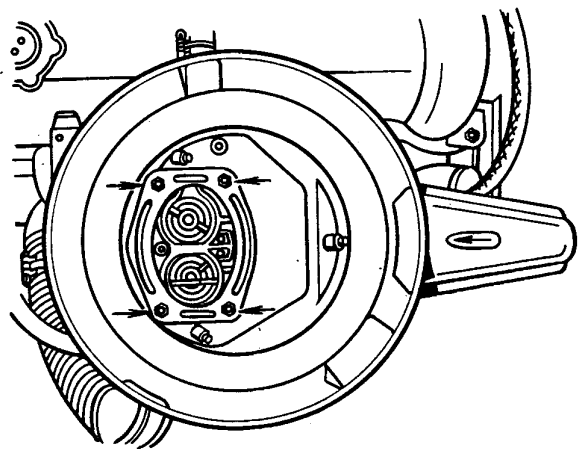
Removing Air Cleaner. Arrows Show Cleaner-to-Carburettor Fastening Nuts
